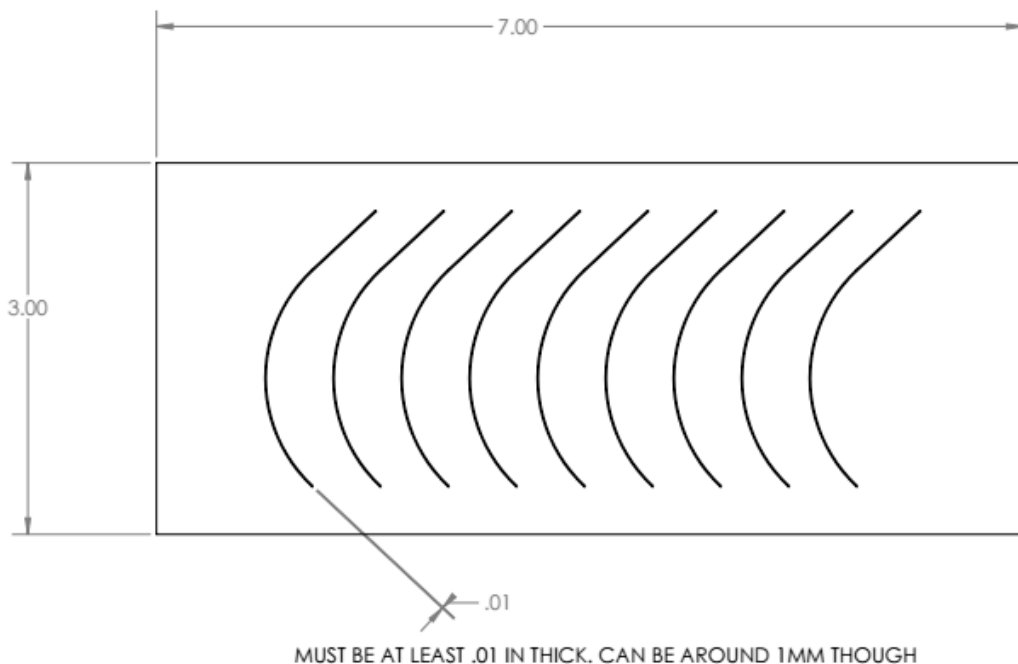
Engineering drawing side view of wind tunnel vane layout.
